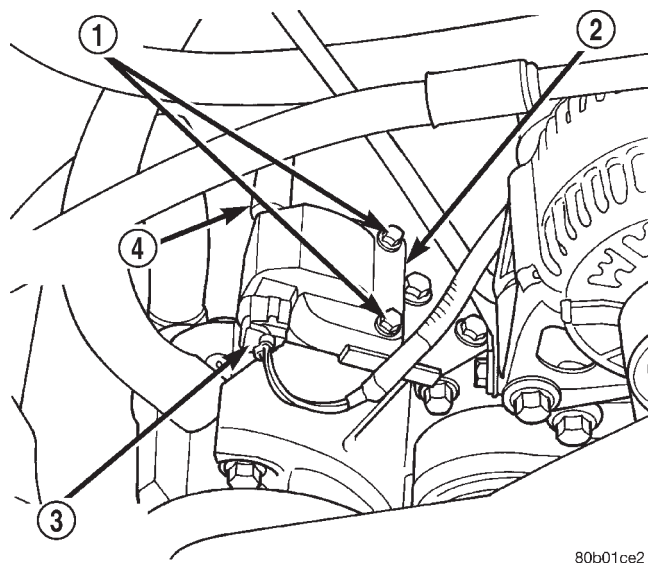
Ignition Coil—5.9L V-8 HDC-Gas Engine
